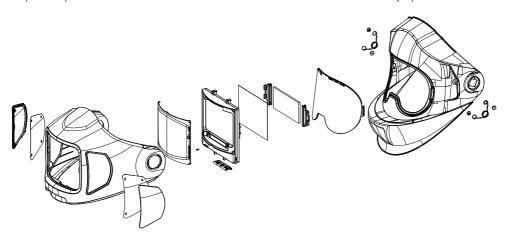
Exploded Line Drawing of Arcmaster Front & Rear Lens Positioning
